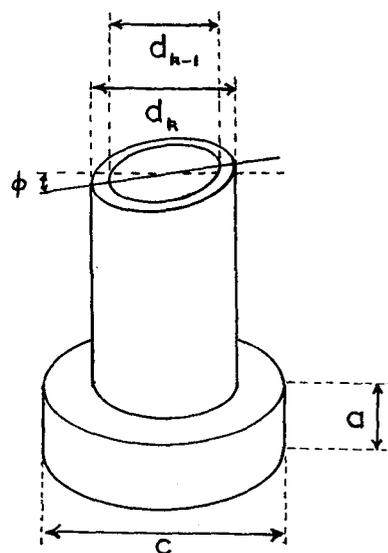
One of the stainless steel tubes of the 12-fold Fafnir multimirror. The upper surface is optically polished and aluminized.
